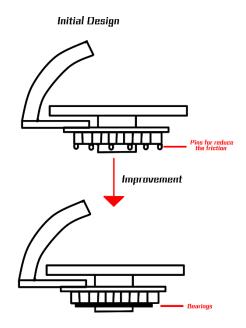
First horizontal movement sketch where bearings are included into the design.
